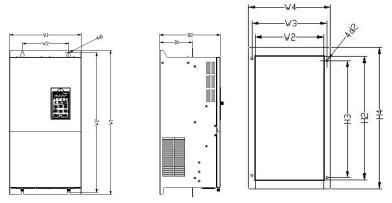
30∼90kW Flange mounting Table 2-4 Flange mounting dimensions table
